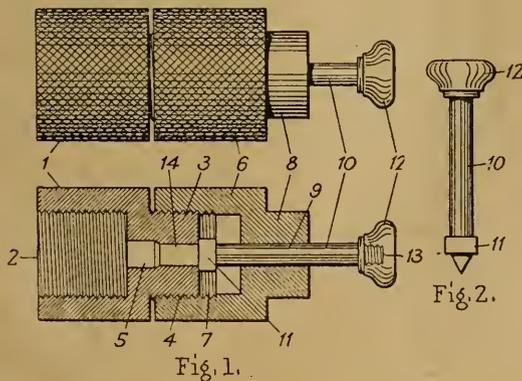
DIAGRAM OF PIPE CLEARING DEVICE ATTACHED TO PIPE.
